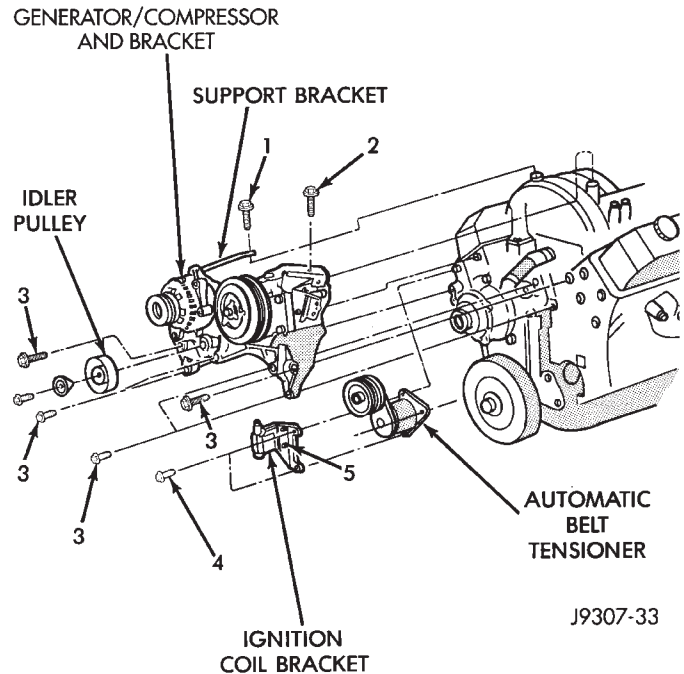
Generator—A/C Compressor Mounting Bracket—3.9/5.2L/5.9L Engine
